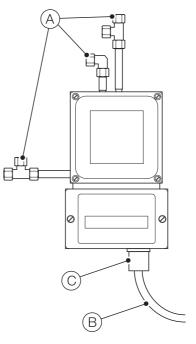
Disconnecting the SMA90 sensor assembly at the process
